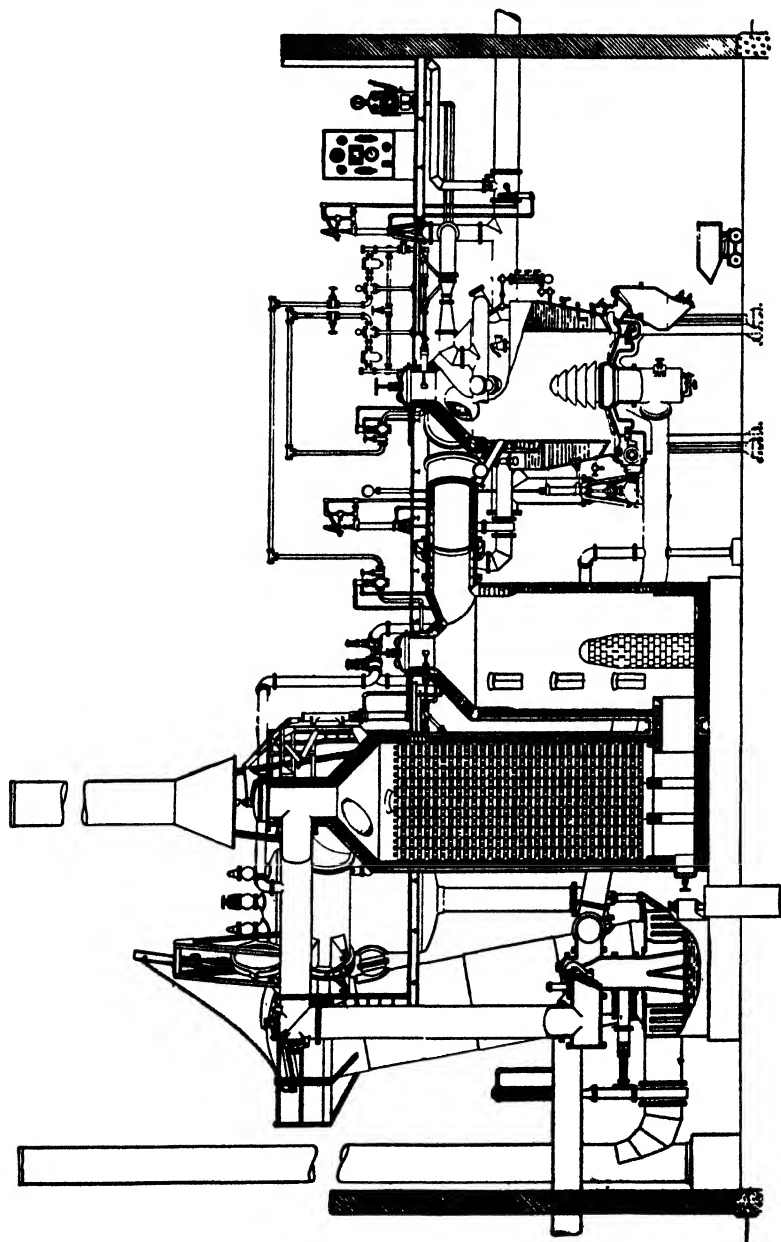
U. G. I. Mechanical Generator Carbureted Water Gas Apparatus.
